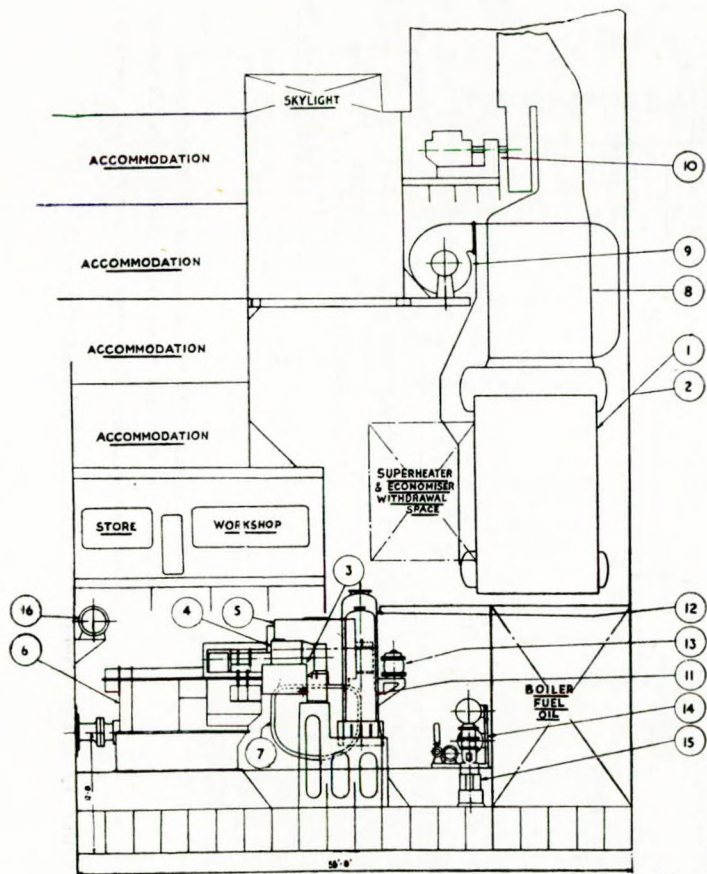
Engine-room layout, 13,000-s.h.p. unit, Scheme 3.
